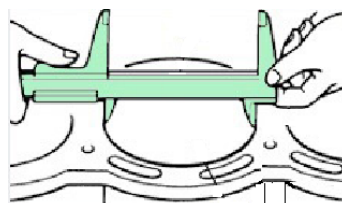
Measuring the diameter of cylinder head with vernier caliper
